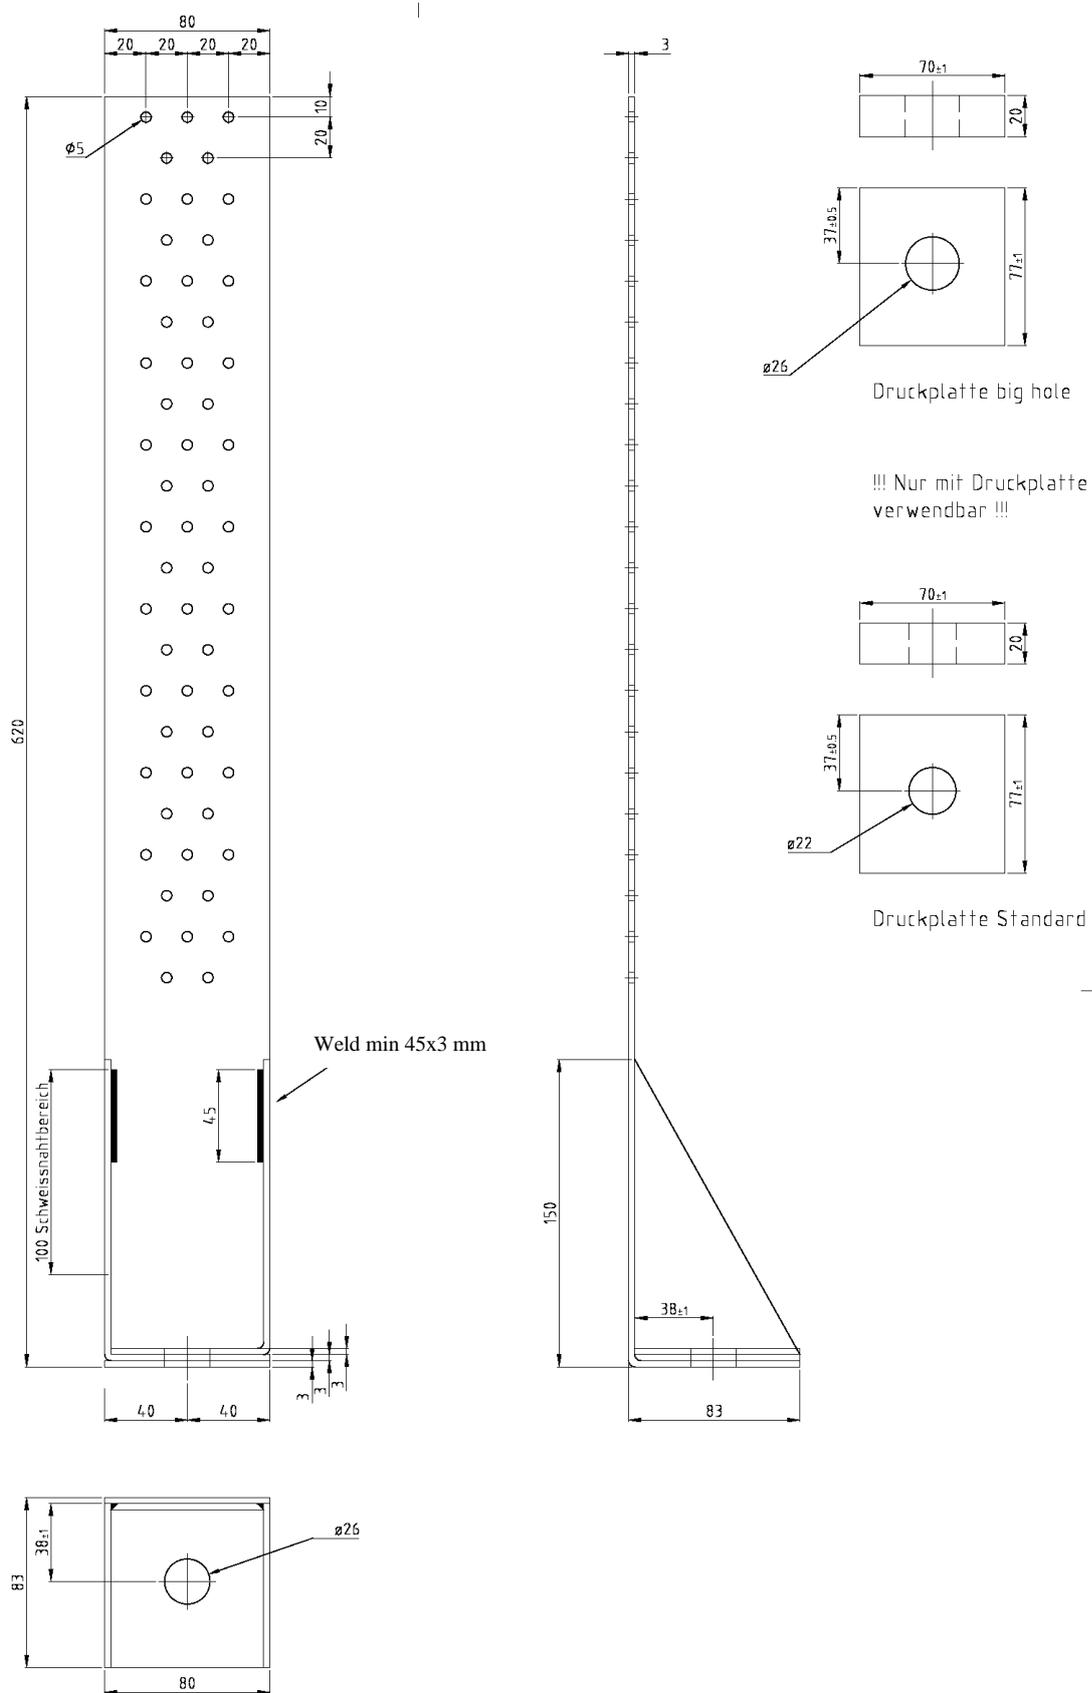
Dimensions of type GH HT34 80/620 Big hole (with washer 77x70x20xØ22 or 77x70x20xØ26)
